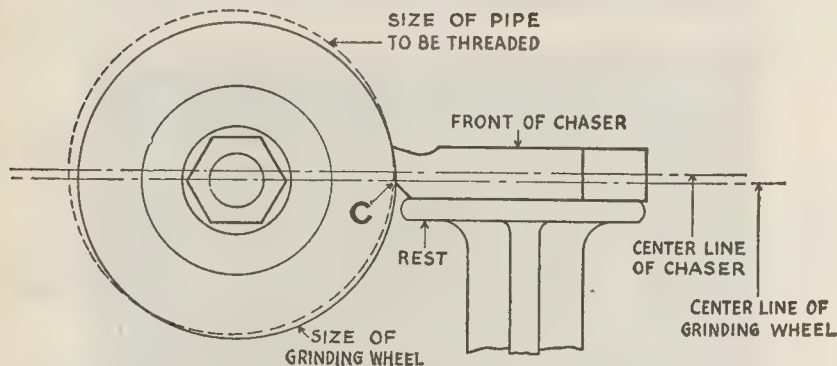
,259.—Proper method of grinding chasers to secure clearance in lead or throat. The chaser is raised or lowered accordingly as the design of the die requires: C, indicates the amount of clearance which will be obtained. The figure shows the approximately correct position for grinding a "stock on center" chaser to secure proper clearance on lead. The chaser in this case should be held in a perfectly horizontal position, the back of the chaser being a little below the center of the grinding wheel, which, for purpose of illustration, is shown as about the same diameter as that of the pipe. Greater clearance may be obtained by slightly raising the rest. When a grinding wheel somewhat larger than the pipe diameter is used, the center of the chaser should be slightly above the center of the wheel. The clearance may be *reduced* by lowering the rest, but the chasers should always be held horizontal unless a specially designed jig or fixture be used to hold the chaser at correct grinding angle.
